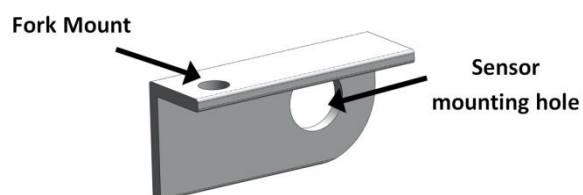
The mounting bracket for the front wheel speed sensor.
